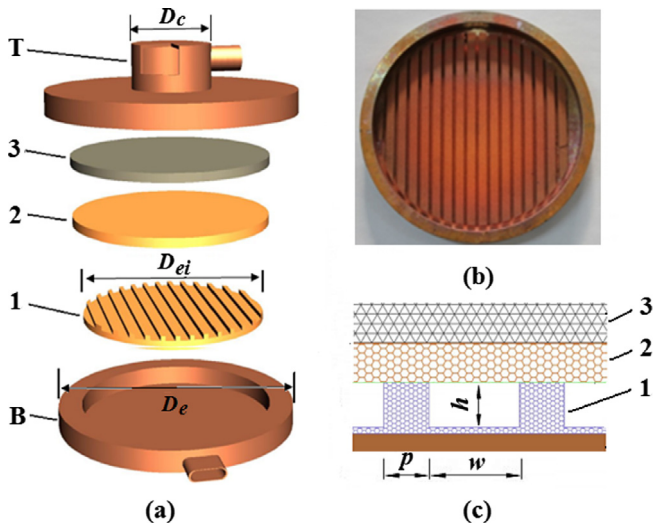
(a) Split structure of the evaporator, wicks, and compensation chamber (T: top cover, B: bottom cover, 1: primary layer wick, 2: second layer wick, 3: third layer wick); (b) the primary layer wick sintered on the evaporator bottom wall; and (c) the position relation of three layer wicks.
